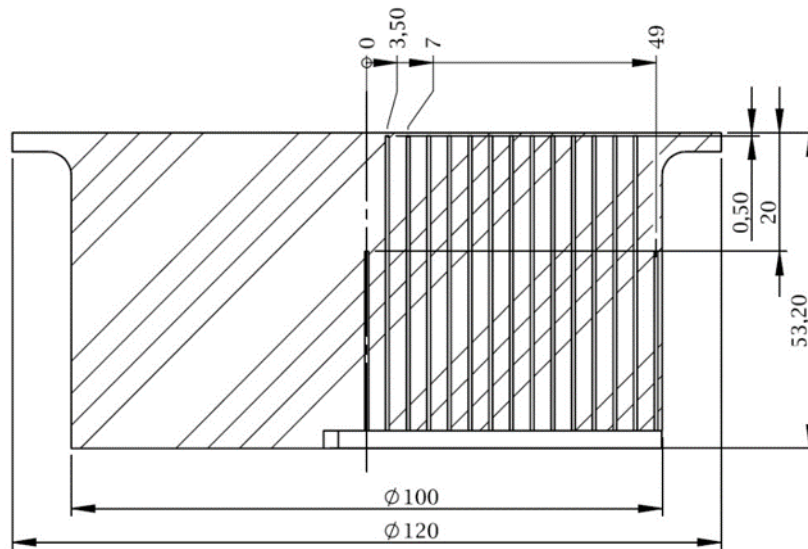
Sectional view of the heated target showing the thermocouple positions. Dimensions are in mm.
